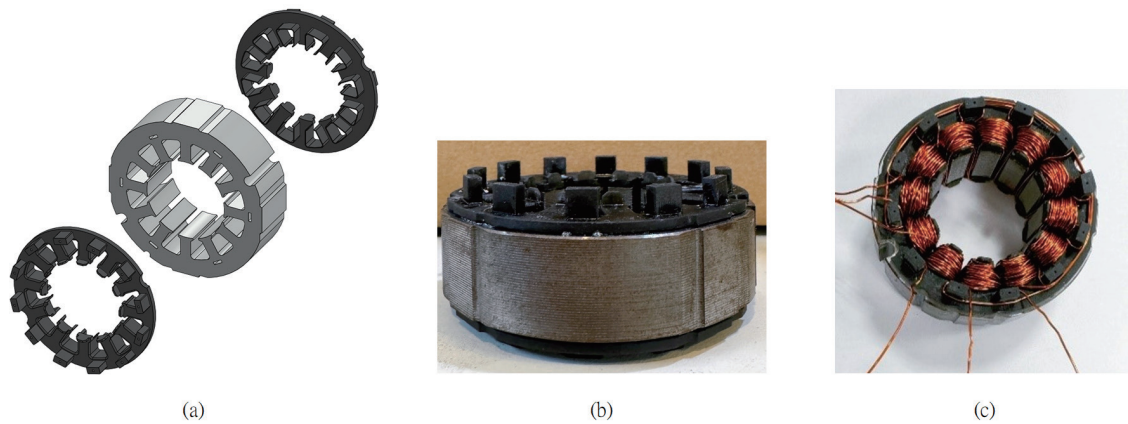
(Color online) Stator fabrication: (a) exploded structural view, (b) completed stator structure, and (c) completed stator winding.
